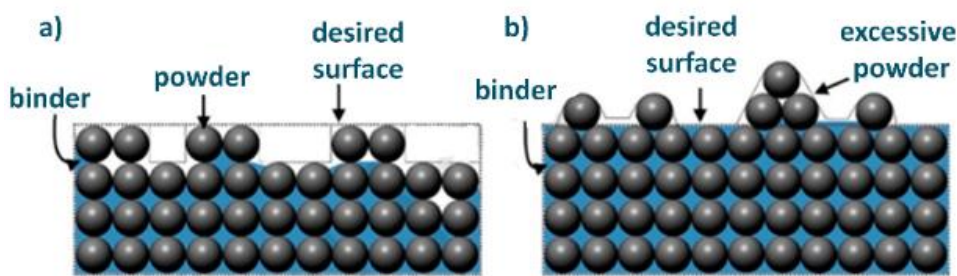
Some of the possible surface defects due to inadequate binder saturation level: (a) low saturation resulted in particle loss and (b) high saturation causing excessive particle stick to the surfaces and reducing dimensional accuracy [11, 472].
